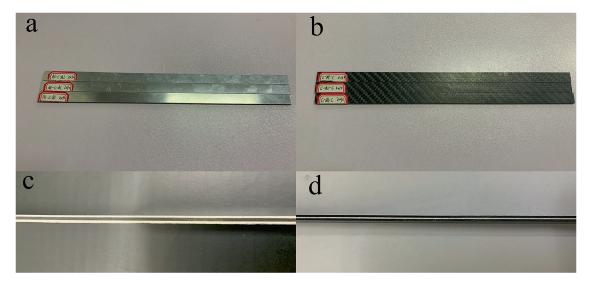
Laminated plate prepared by molding process: (a) Al-CFRP-Al laminated plate after cutting; (b) CFRP-Al-CFRP laminated plate after cutting; (c) Cross-section of Al-CFRP-Al laminated plate; (d) Cross-section of CFRP-Al-CFRP laminated plate.
